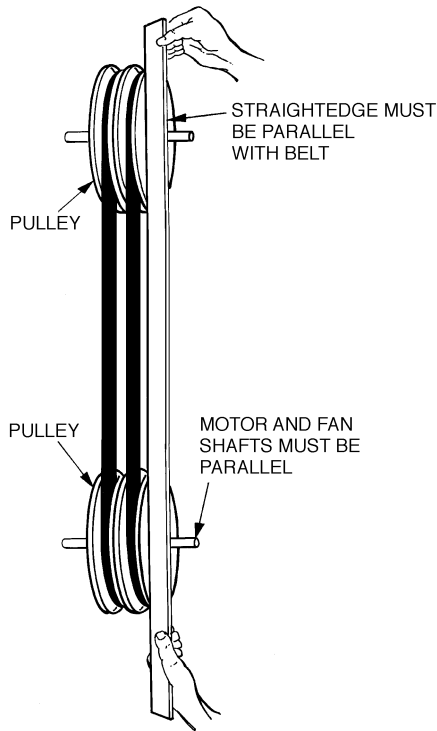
Evaporator-Fan Alignment and Adjustment
